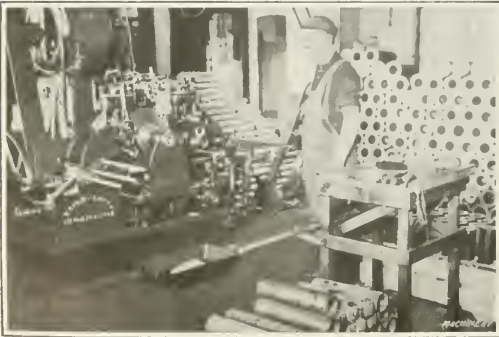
Cutting off Excess Stock from Open and Closed Ends of Forging
